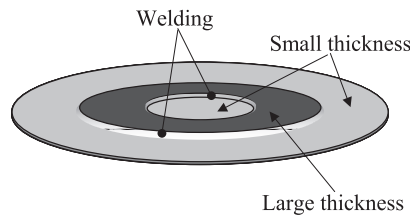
Tailor blank having local thickening formed from different parts by laser welding.
